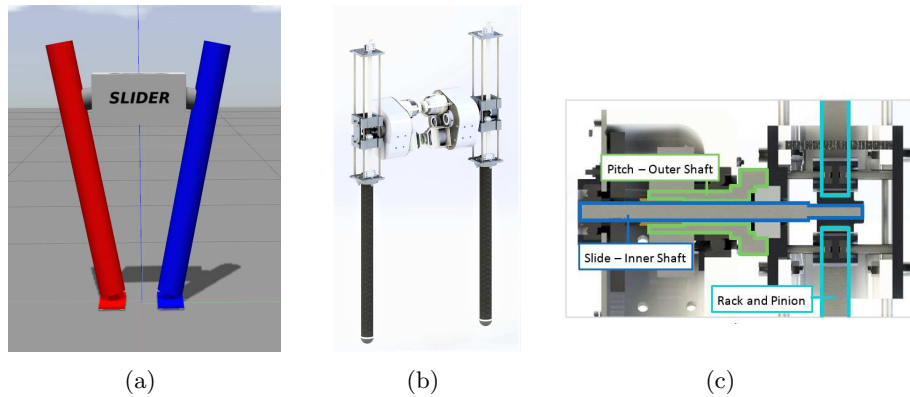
(a) SLIDER model simulated in Gazebo. (b) A rendering of the initial mechanical design. (c) The inner view of the motor box.
